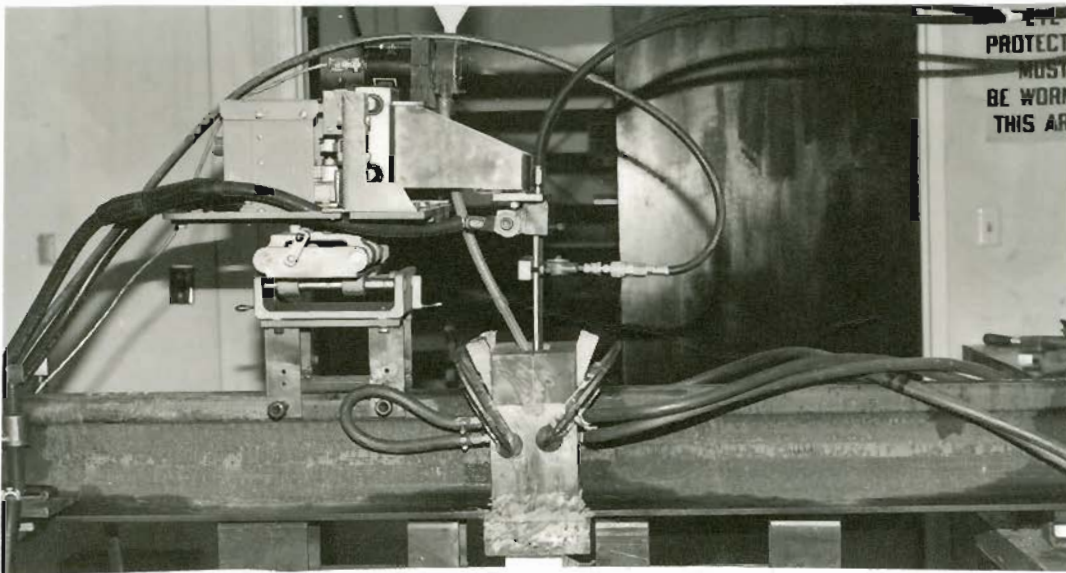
ELECTROSLAG RAIL WELDING SETUP AND COMPLETED WELD.
